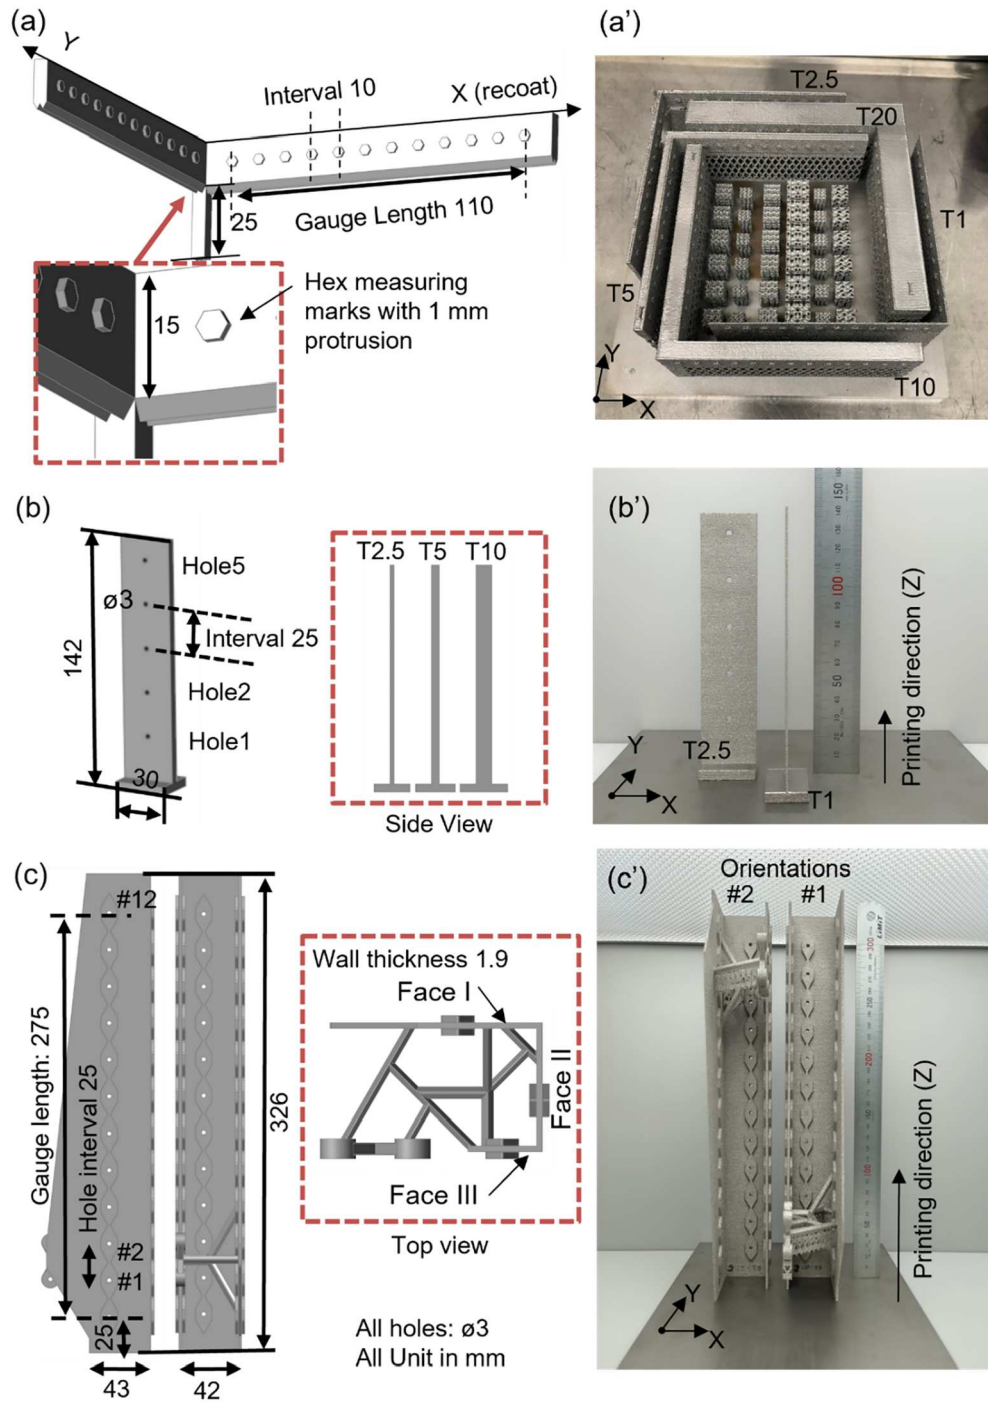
Sketch of (a) L-shaped beam with measurement marks, (b) vertical beam and (c) a long bracket component design with holes as measuring marks. (a'–c') Photos of as-printed specimens.
